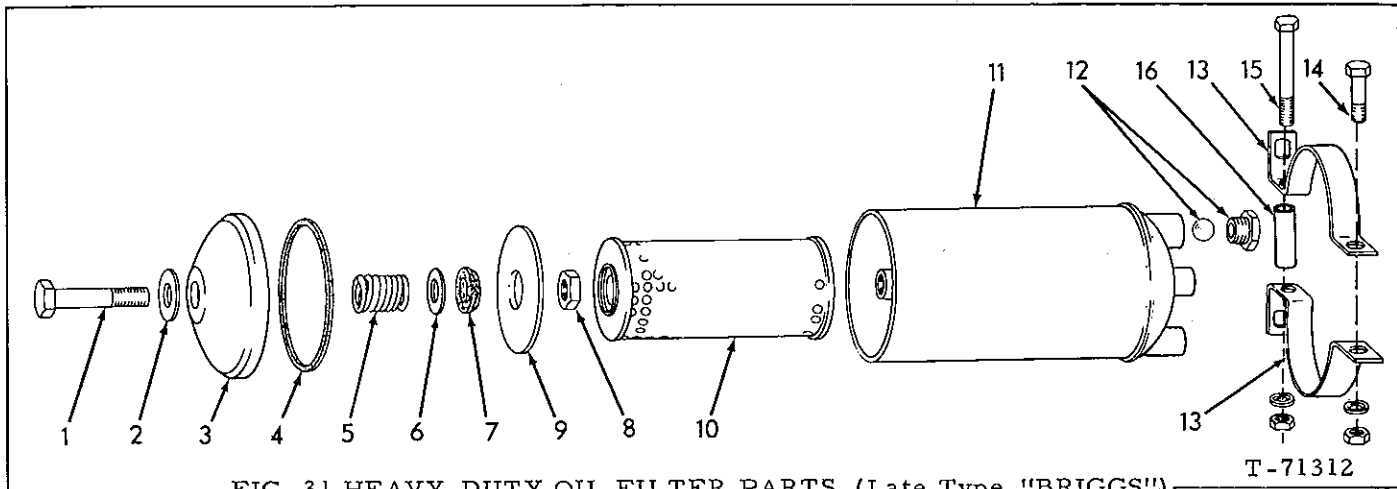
HEAVY-DUTY OIL FILTER PARTS (Late Type "BRIGGS")
